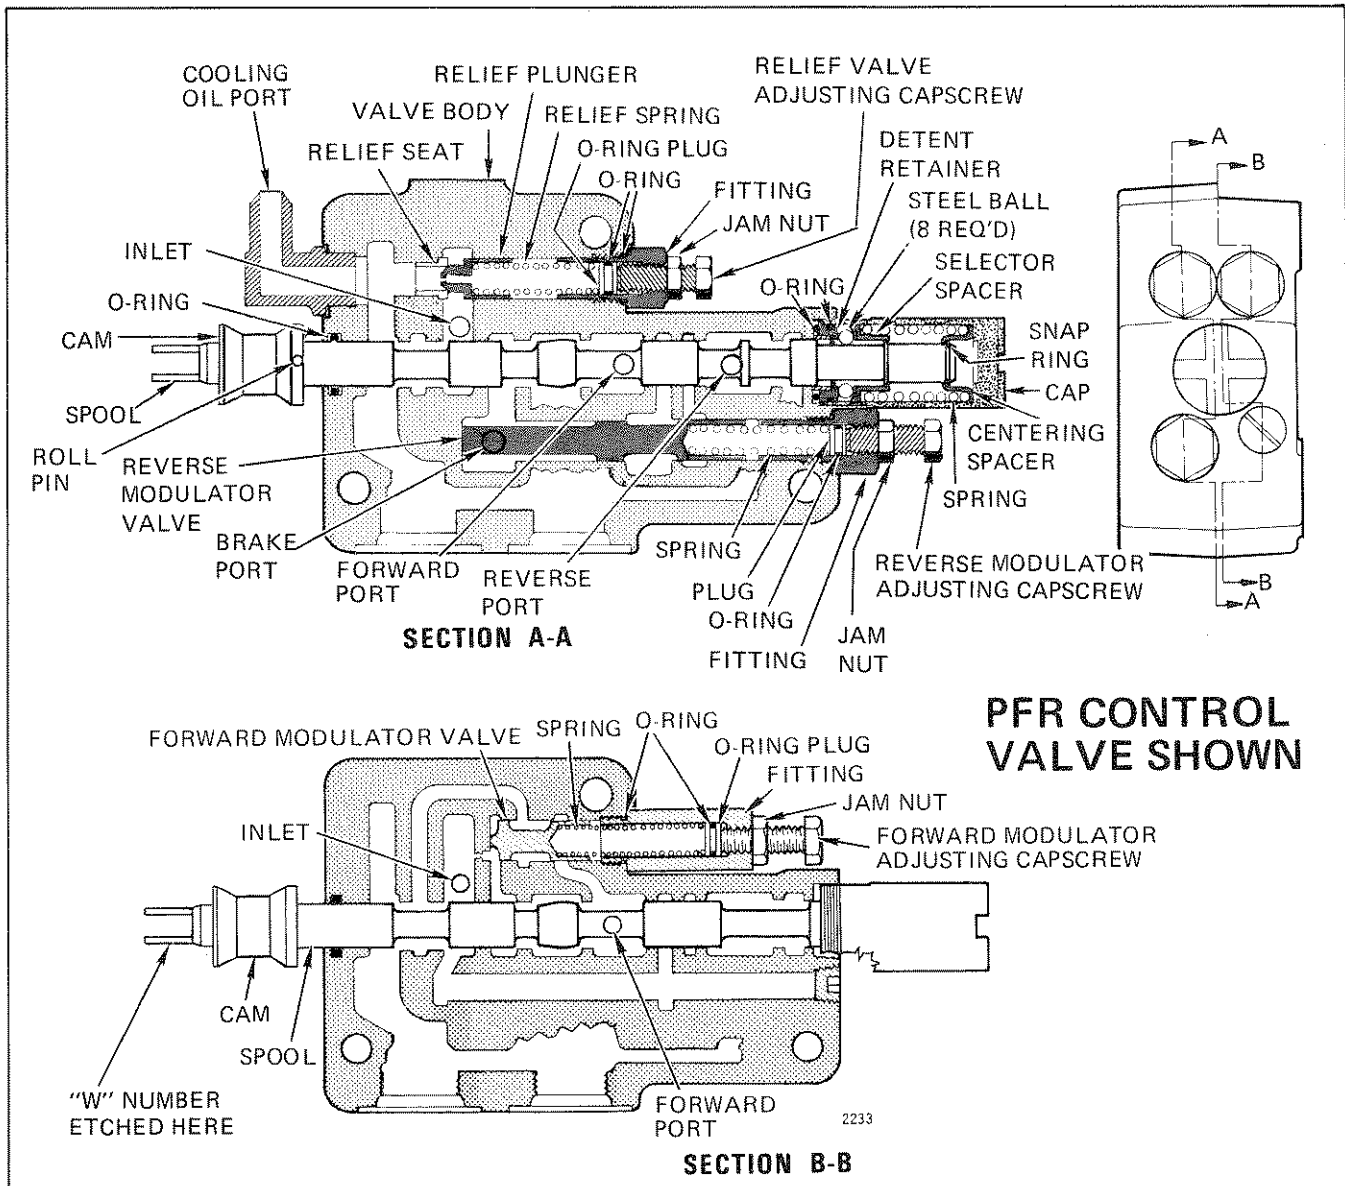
CONTROL VALVE REPAIR (Sheet 2 of 3)
